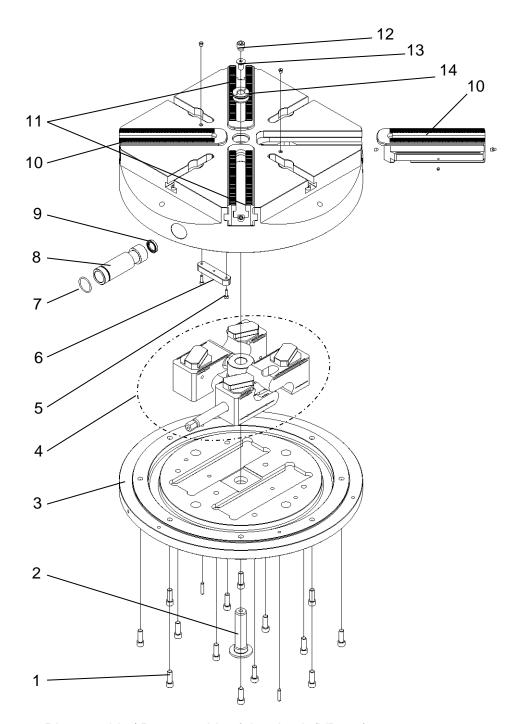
Disassembly / Re-assembly of the chuck (VD063)
